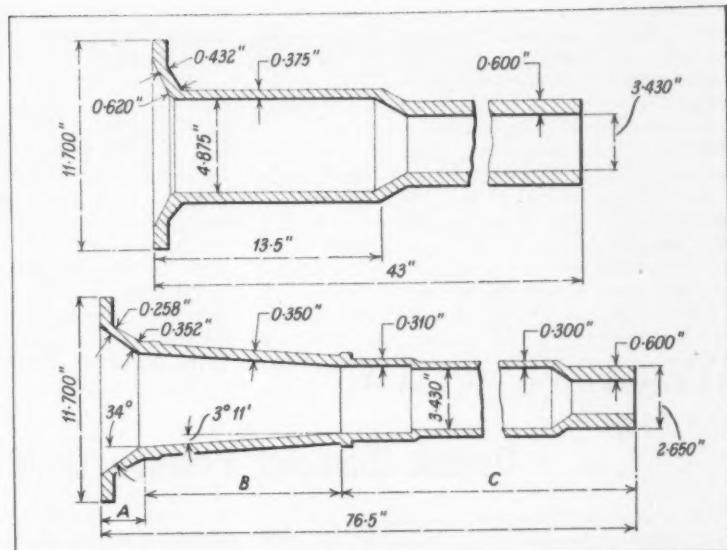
The Gas Turbine Drive-shaft, seen in the Lower View, is Flow Turned from a 43-in. Long, Upset and Pierced Forging of Alloy Steel
